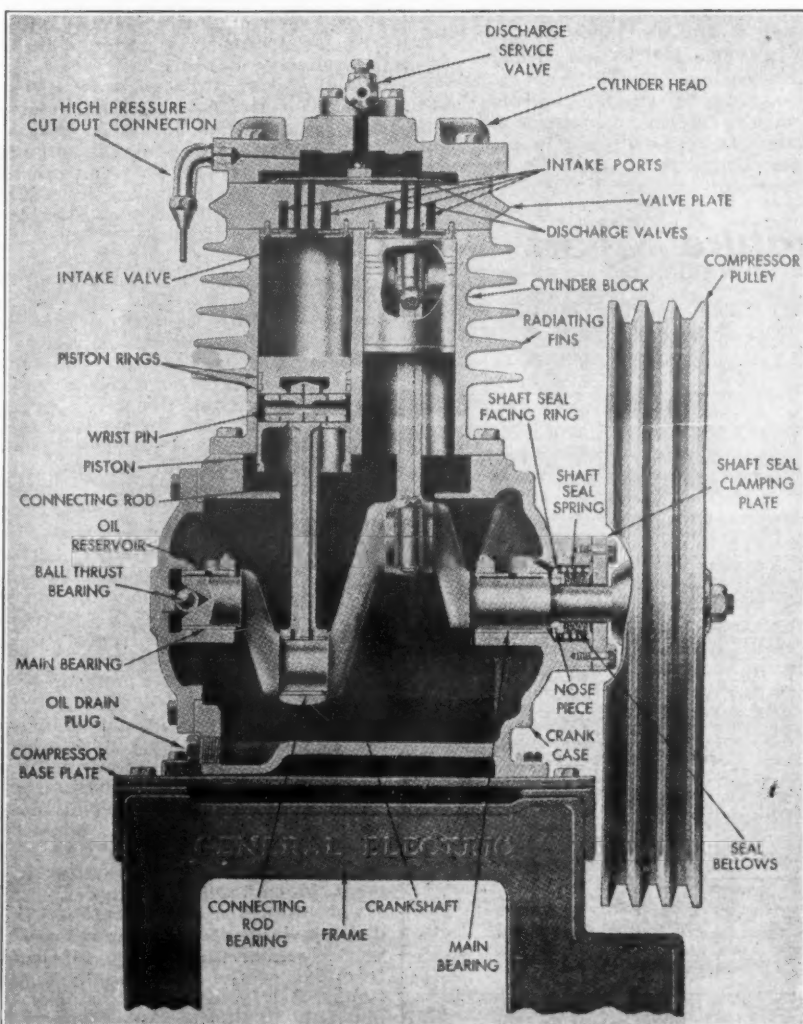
Sectional view of the General Electric CM compressor, showing details of construction. Note in particular bearing design and relative location of lubrication elements.
